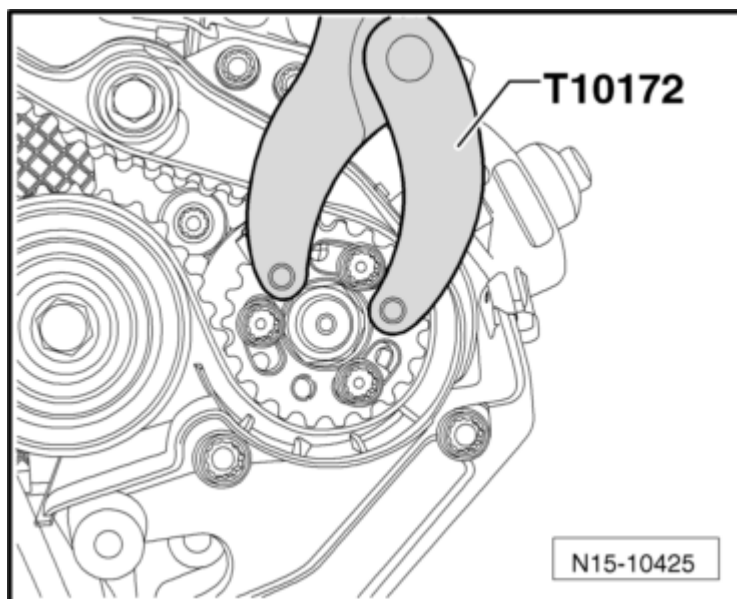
Identifying Counterhold Tool Touareg V10 T10172
